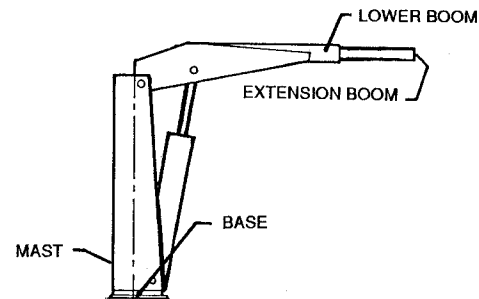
WELDMENT PART NUMBER LOCATIONS
